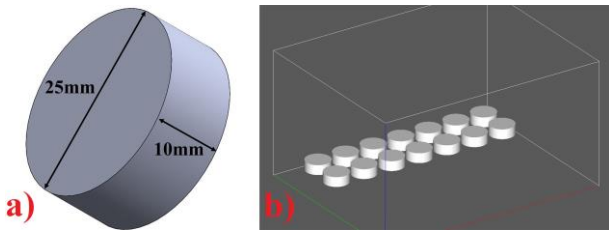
a) Specimen dimensions for ISO 5833 standards, b) Placement of specimens in the building area
